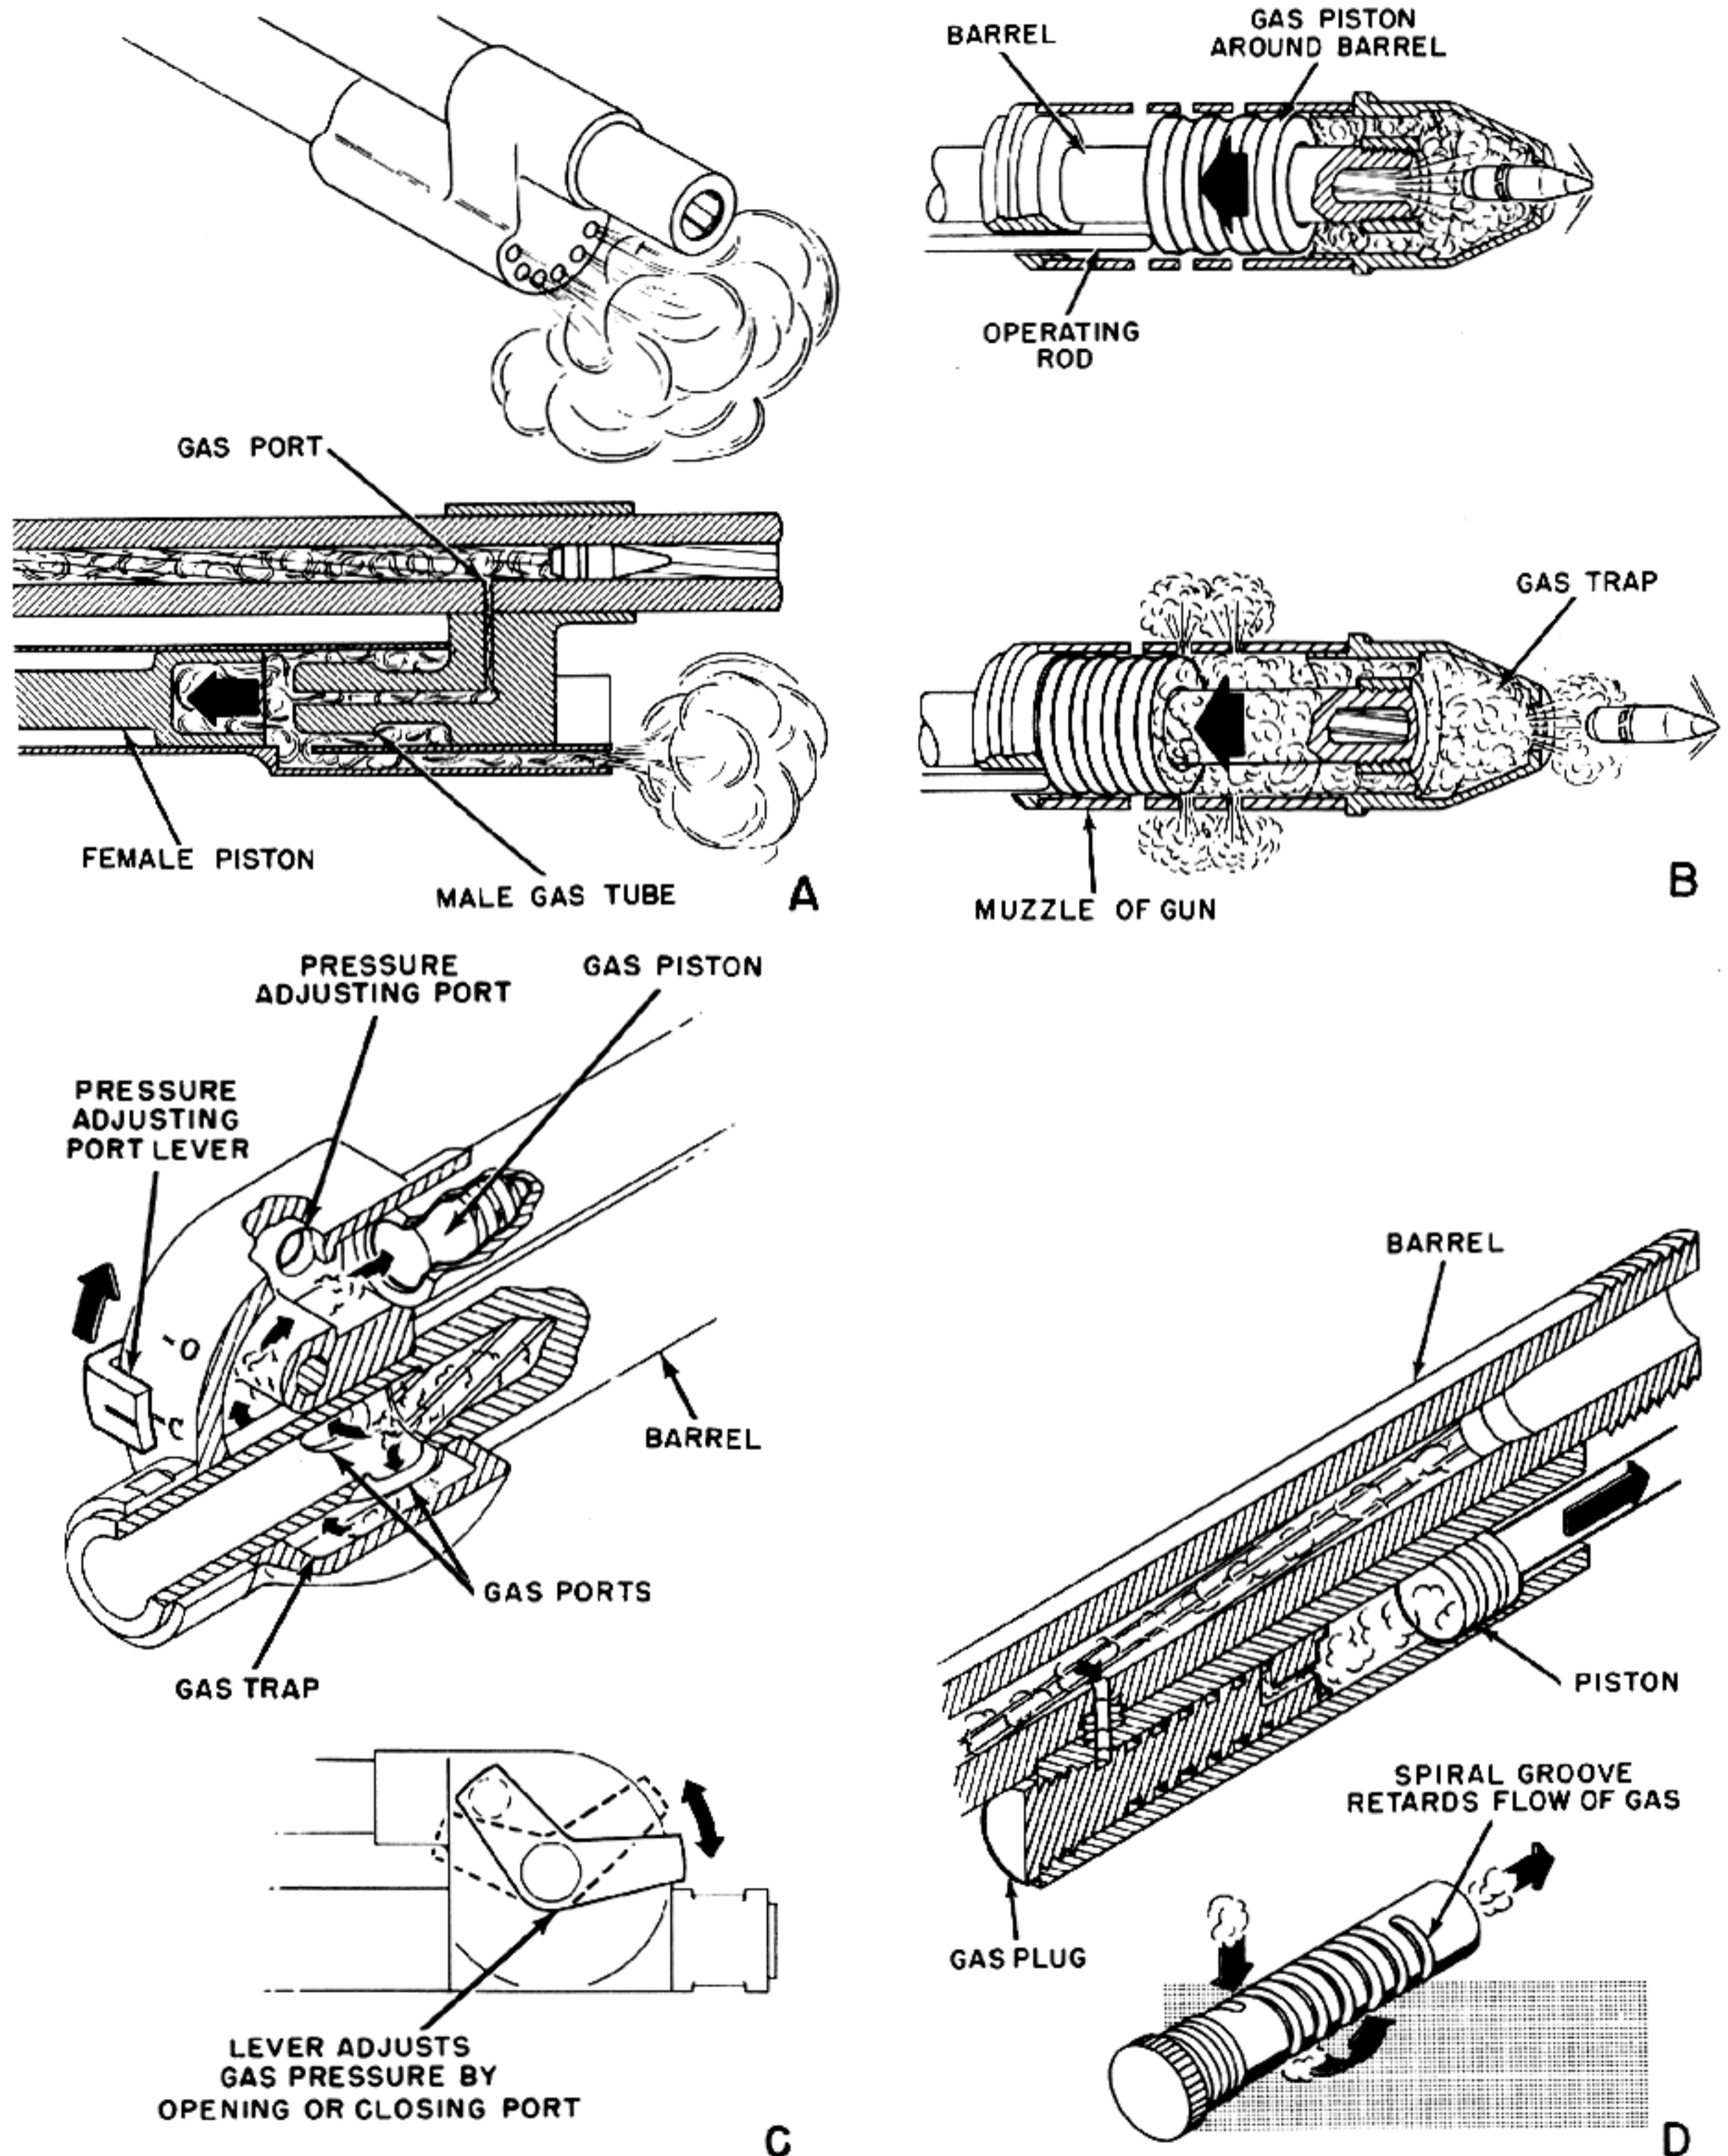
Various Methods of Adjusting, Utilizing and Retarding Gas Pressure.
